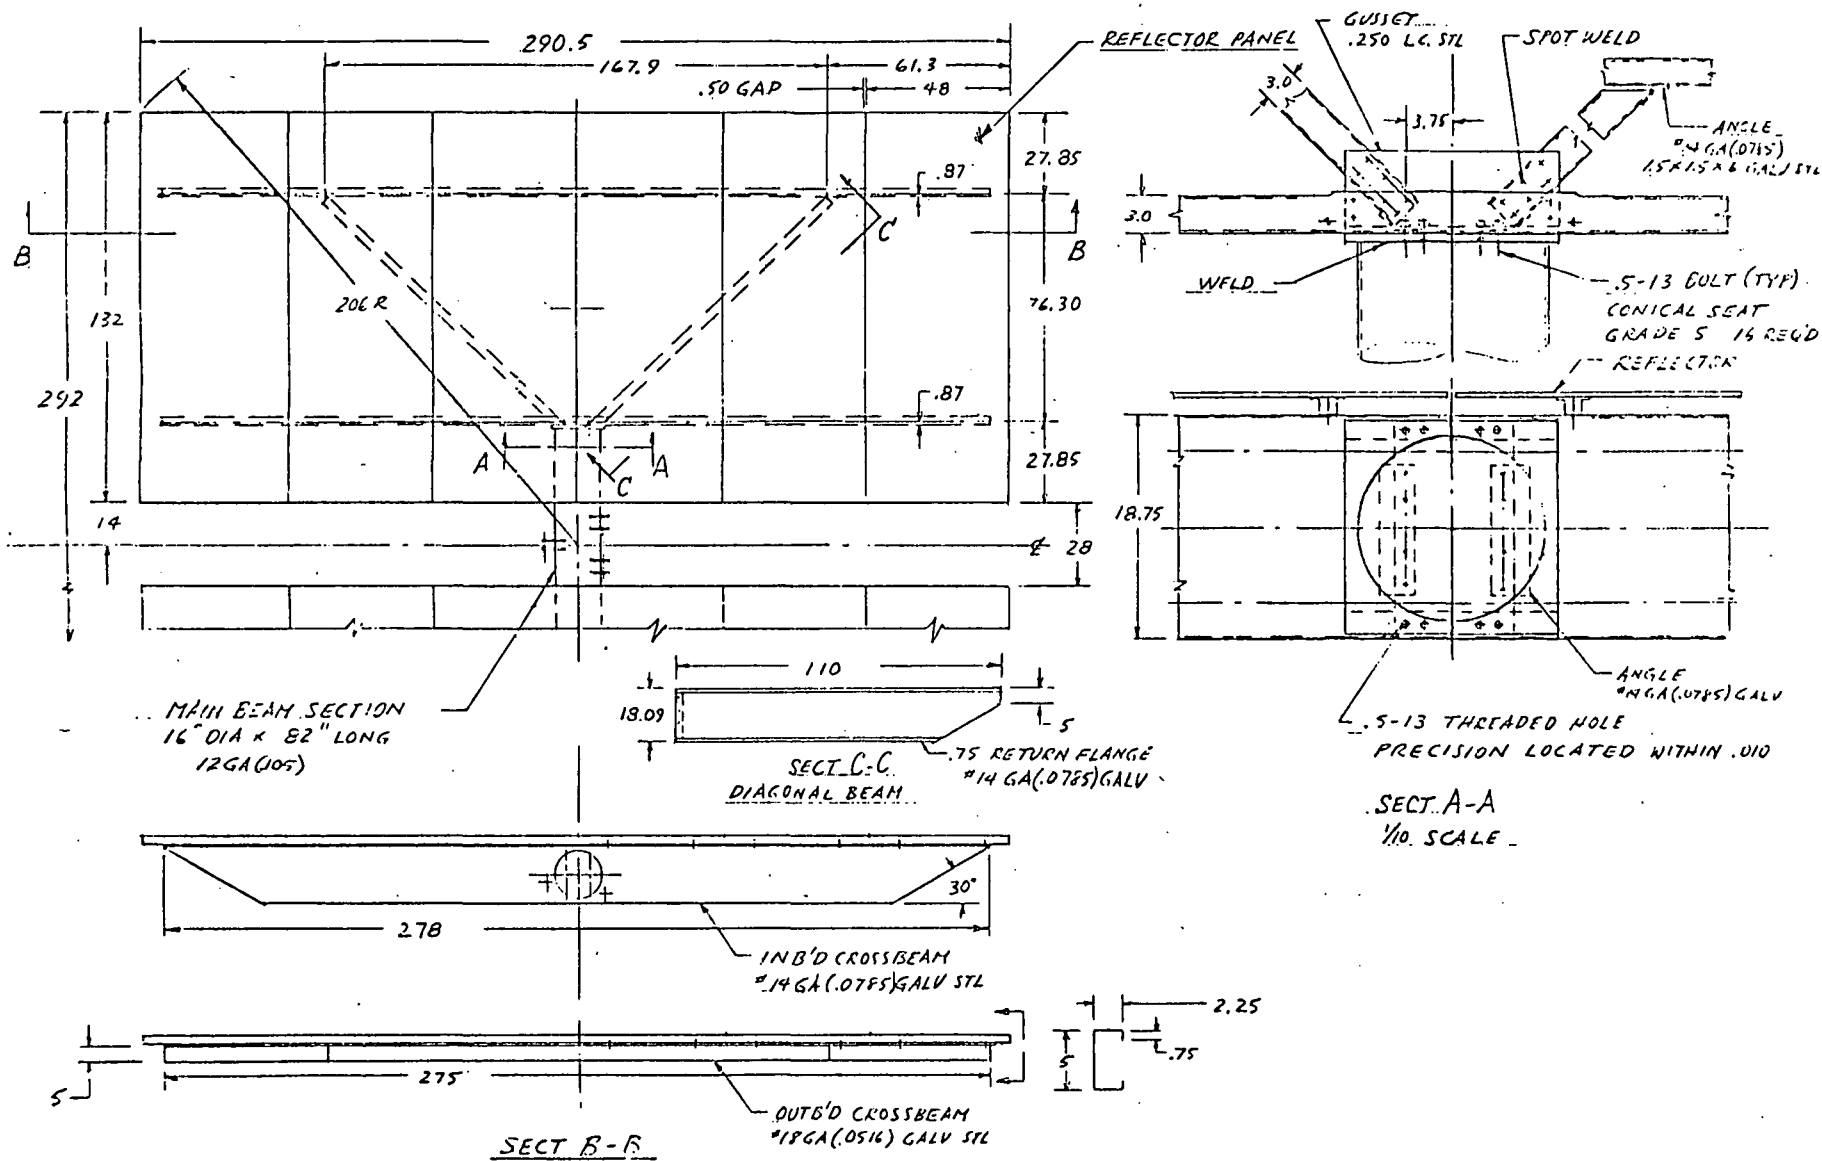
Alternate 3 - Two Segment - One-Piece Tube
